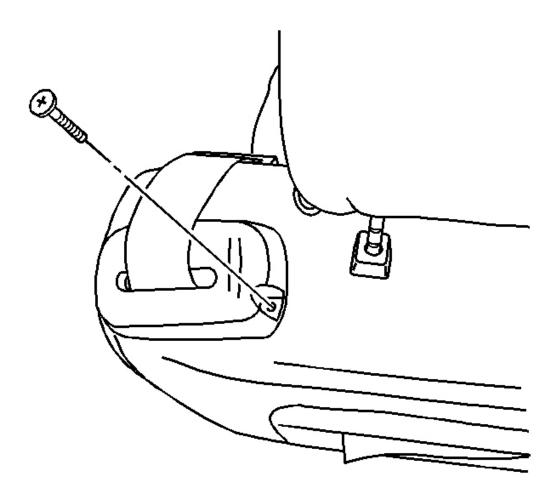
Identifying Seat Belt Bezel Retaining Screw Courtesy of GENERAL MOTORS CORP.
